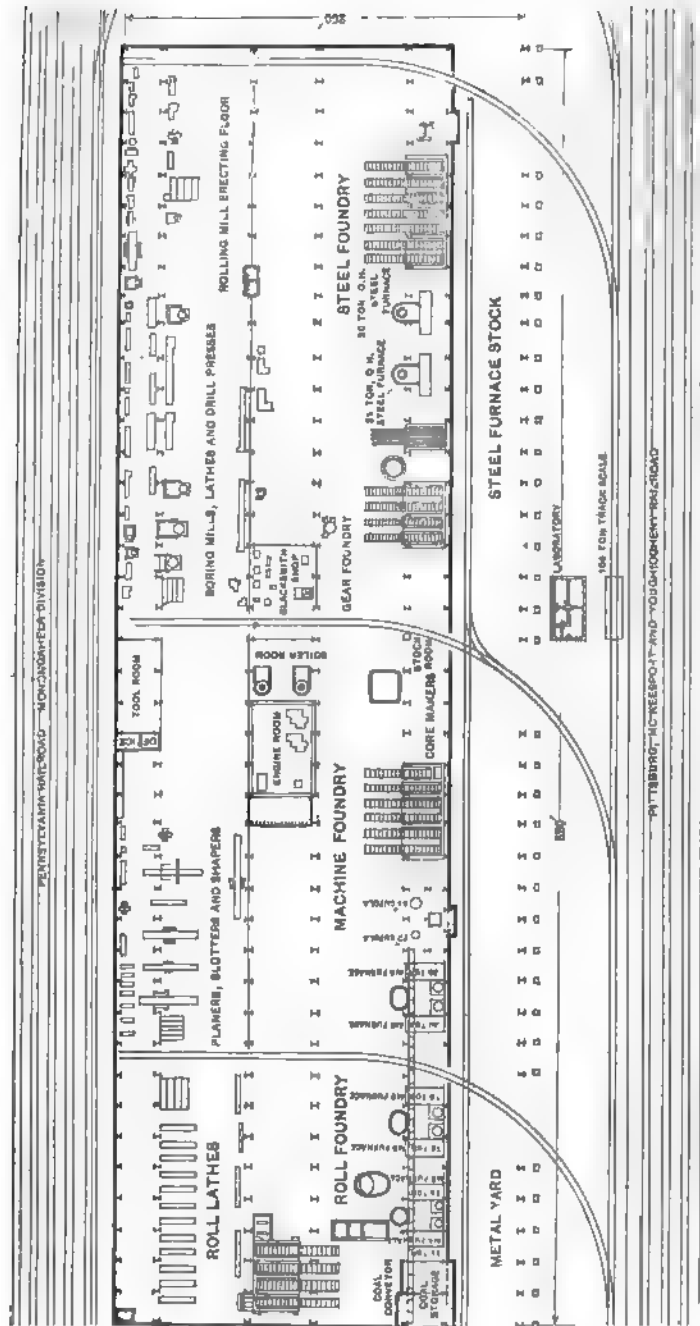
PLAN OF THE FOUNDRIES, ETC., OF THE MESTA MACHINE CO., PITTSBURG.
